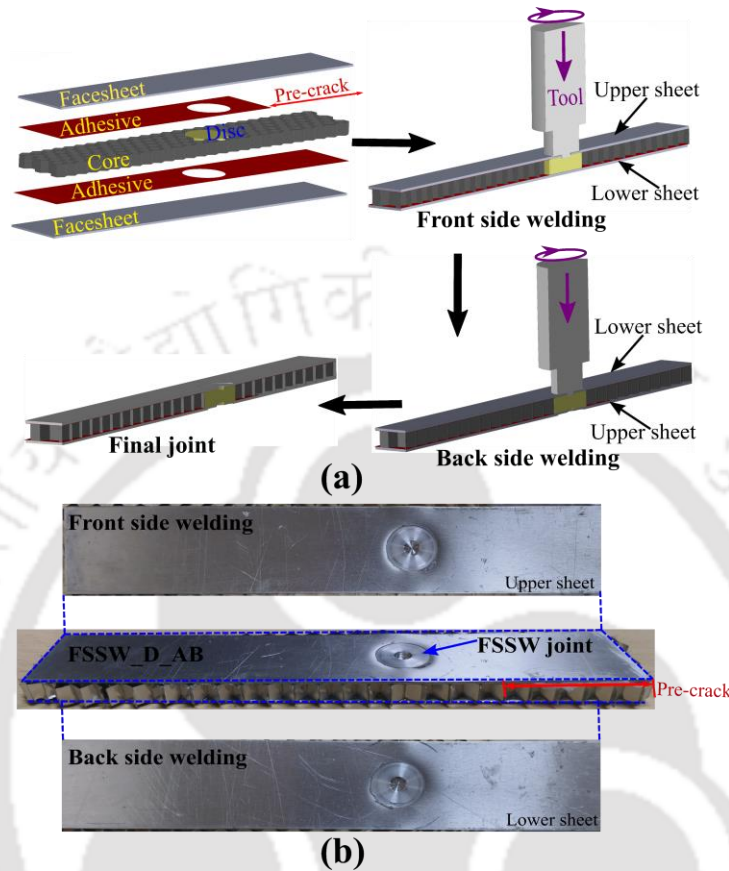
Manufacturing of MMB specimen by hybrid process (a) cross-sectional view and (b) actual manufactured specimen
